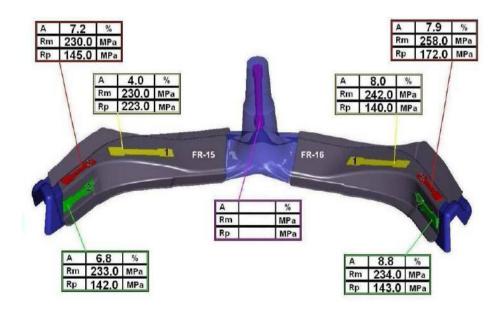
Ingrate and feeding system to produce two space frames and the zones suitable to machine samples for tensile test
